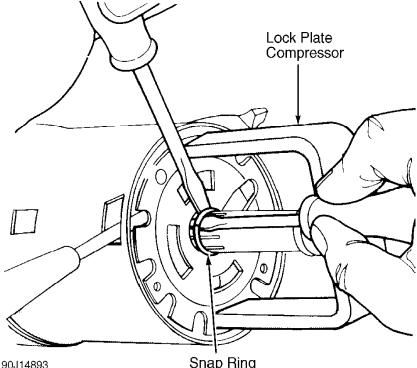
Removing Lock Plate & Snap Ring Courtesy of Chrysler Corp.
